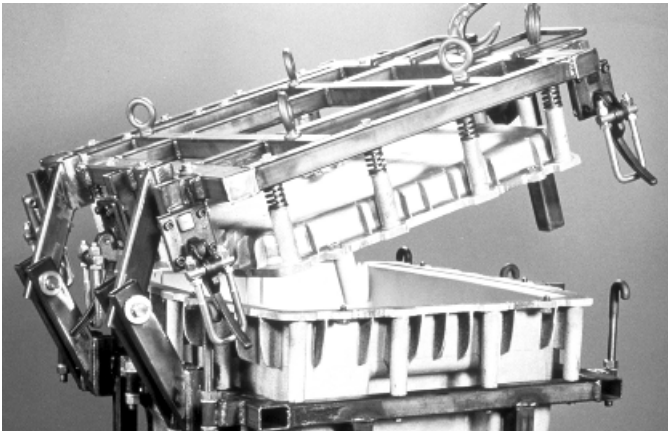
Mold hinging mechanism. (Courtesy of Wheeler Boyce, Inc.)
